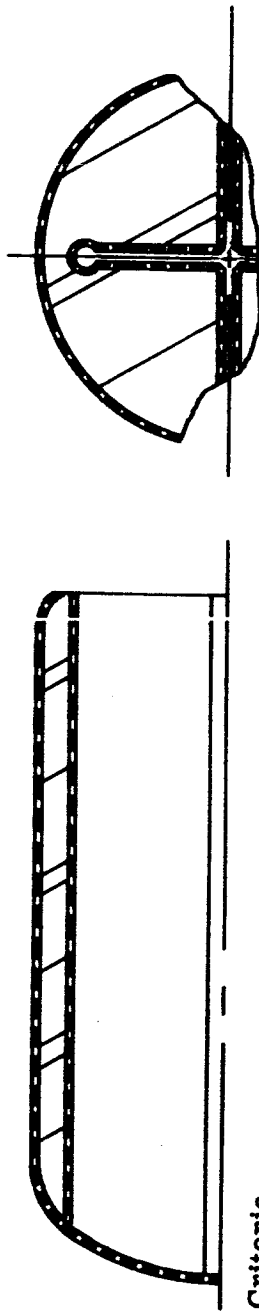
DESIGN 11 - INTERNALLY RELIEVED END BURNER
